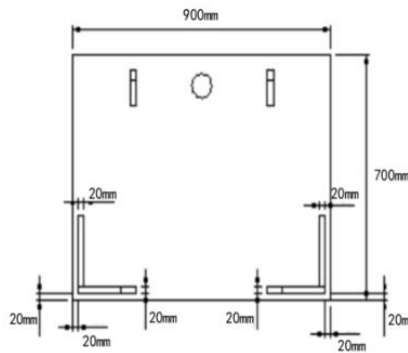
Front View Design Diagram of the Steel Hanging Plate
